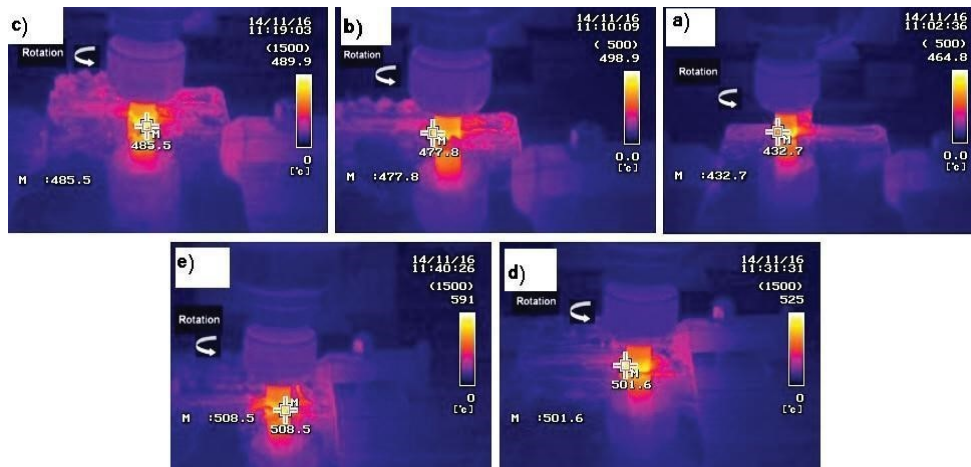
The effect of tool rotational speed on the surface where the tool touches the workpiece. a) 600rpm, b) 800rpm, c) 1250rpm, d) 1600rpm, and e) 2000rpm [44].
